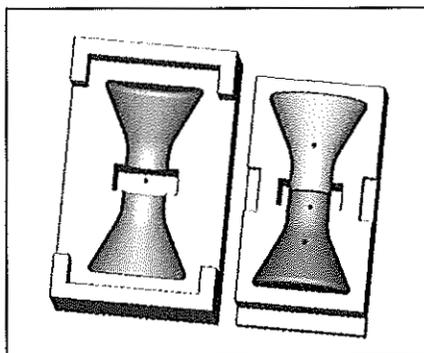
CAD design of specimen seating jig with design of two half-dumbbell specimens inserted.
